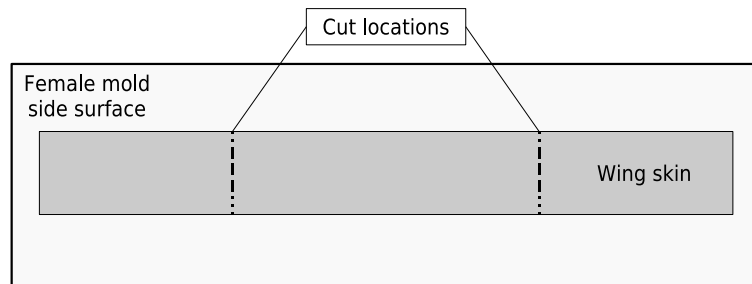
Cutting process of the lower skin in the female mold (top view)
